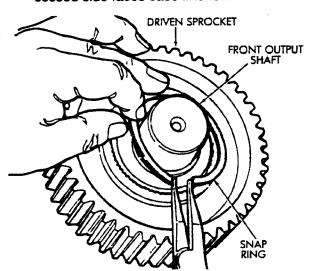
Remove Snap Ring and Driven Sprocket
